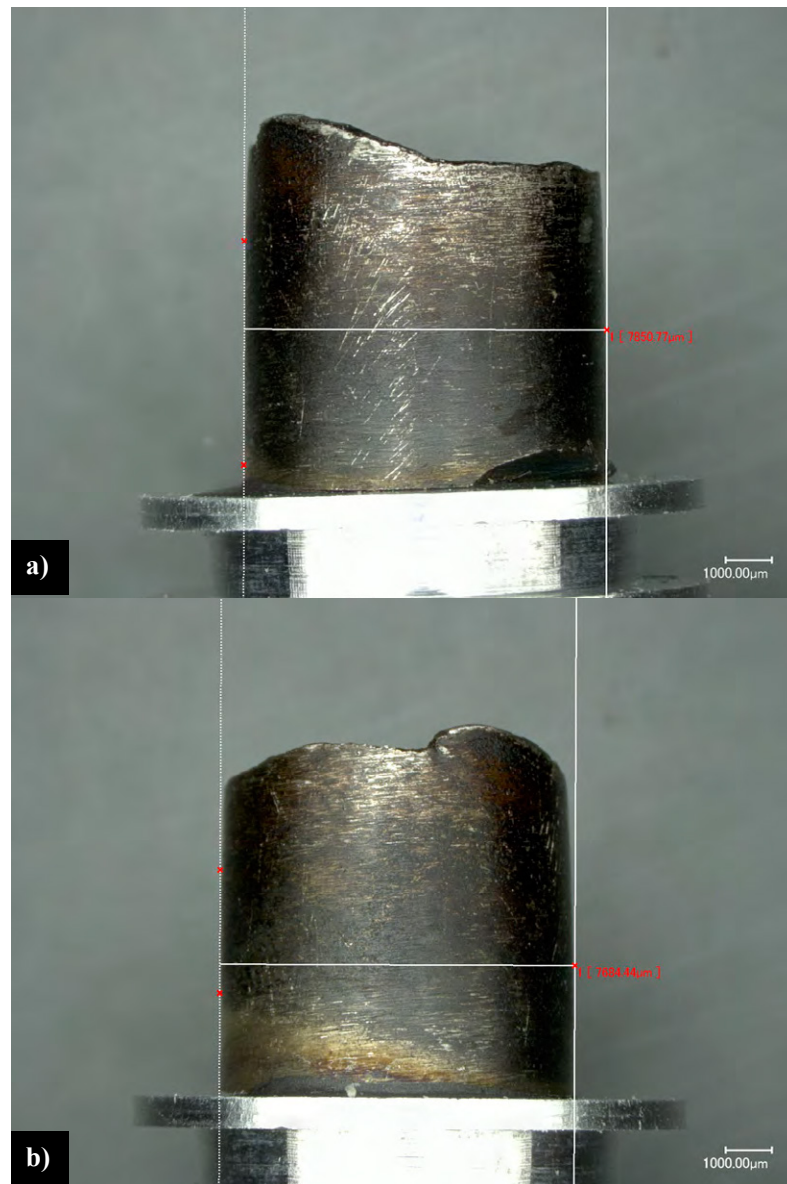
Side view of the oil tube fracture surface {1,1} showing tube necking from the directions indicated in Fig. 15
